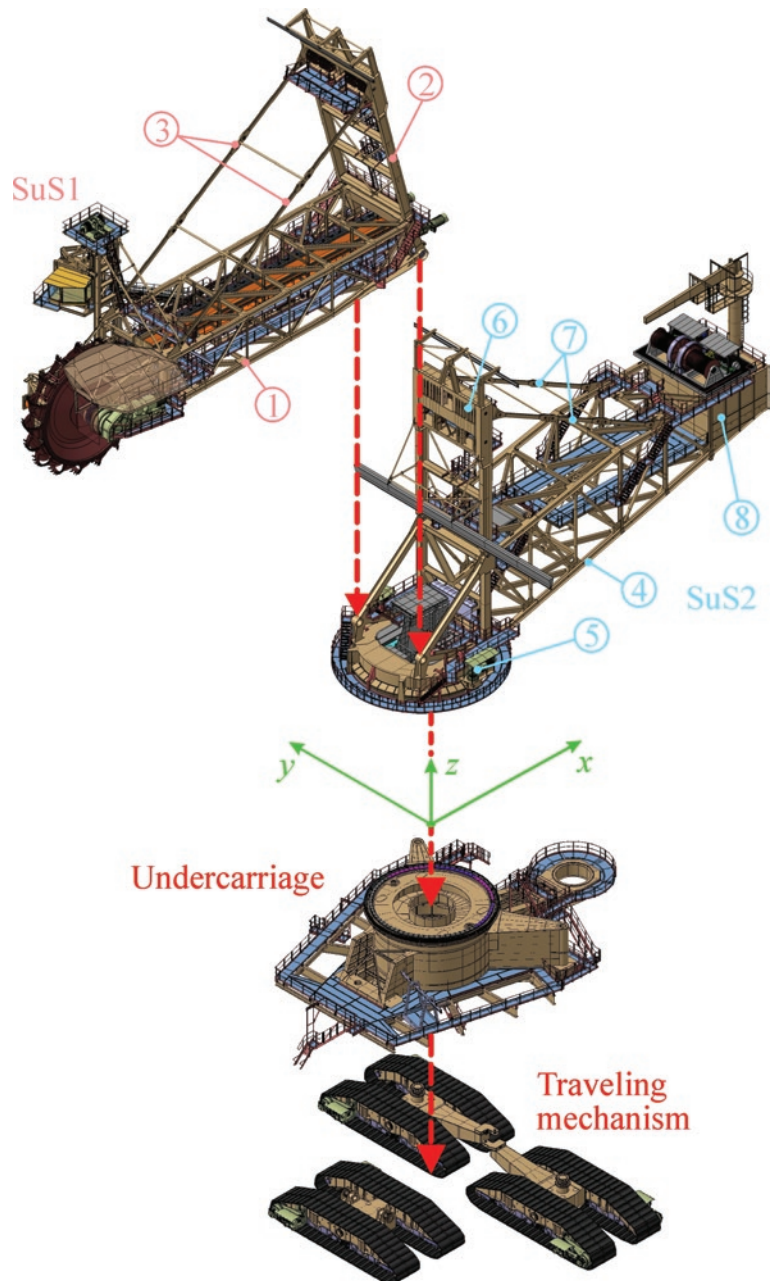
Basic substructures of the BWE 1600: 1-bucket wheel boom; 2-mast 1; 3-bucket wheel boom stays; 4- counterweight boom; 5- slewing platform; 6-mast 2; 7-counterweight boom stays; 8- counterweight
